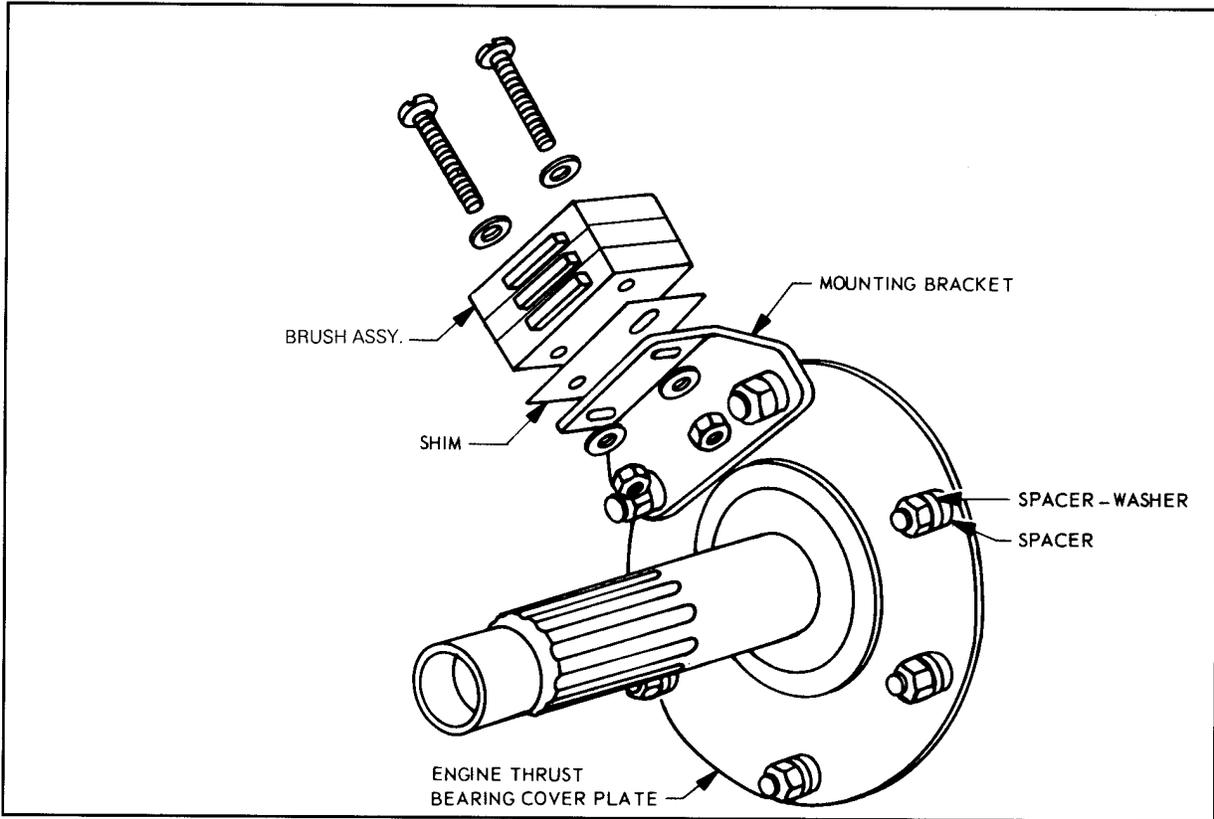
Typical Brush Assembly Mounting Bracket Installation
